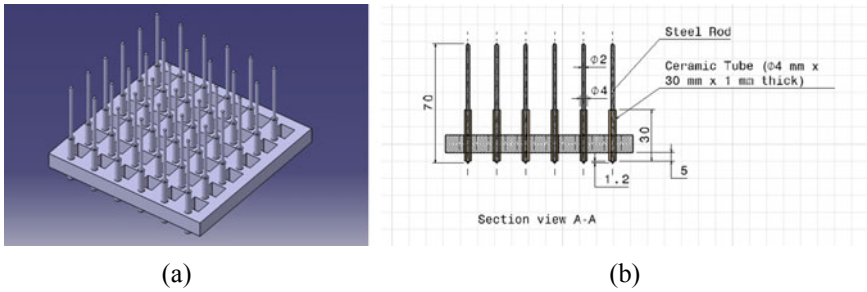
Proposed sensor array assembly for detection of gas bubbles over a wider cross section: a 3D view of sensor assembly; b dimensional schematic for sensor array assembly
